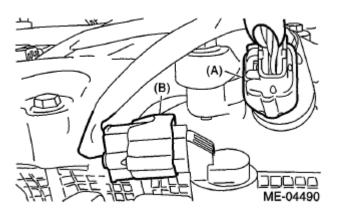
Identifying Exhaust Oil Flow Control Solenoid Valve RH And Exhaust Camshaft Position Sensor RH Courtesy of SUBARU OF AMERICA, INC.
